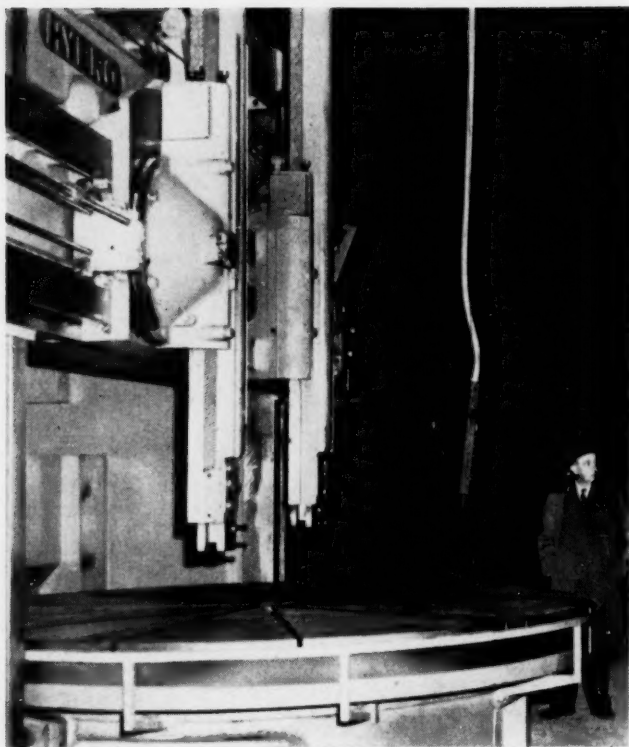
Shown here is a view of a Hypro boring machine which has a maximum swing of 151 inches and height under rail of 86 inches.
